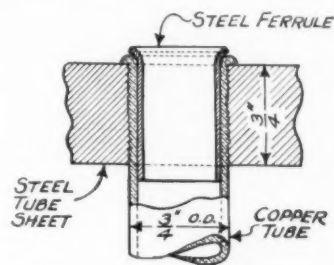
CROSS SECTION SHOWING OLD METHOD OF BOILER CONSTRUCTION IN WHICH COPPER TUBES ARE EXPANDED, BEADED, AND FERRULED IN STEEL HEADS
